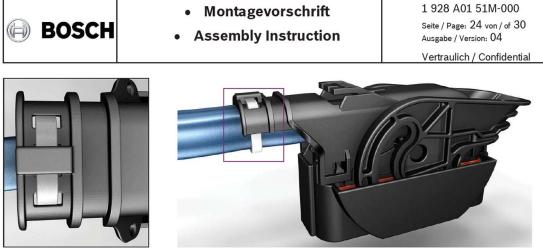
Cable attachment in the 38-way connector in case of reduced wiring harness diameter Abb. 28: Leitungsbefestigung am 38-poligen Stecker bei Minderbestückung
